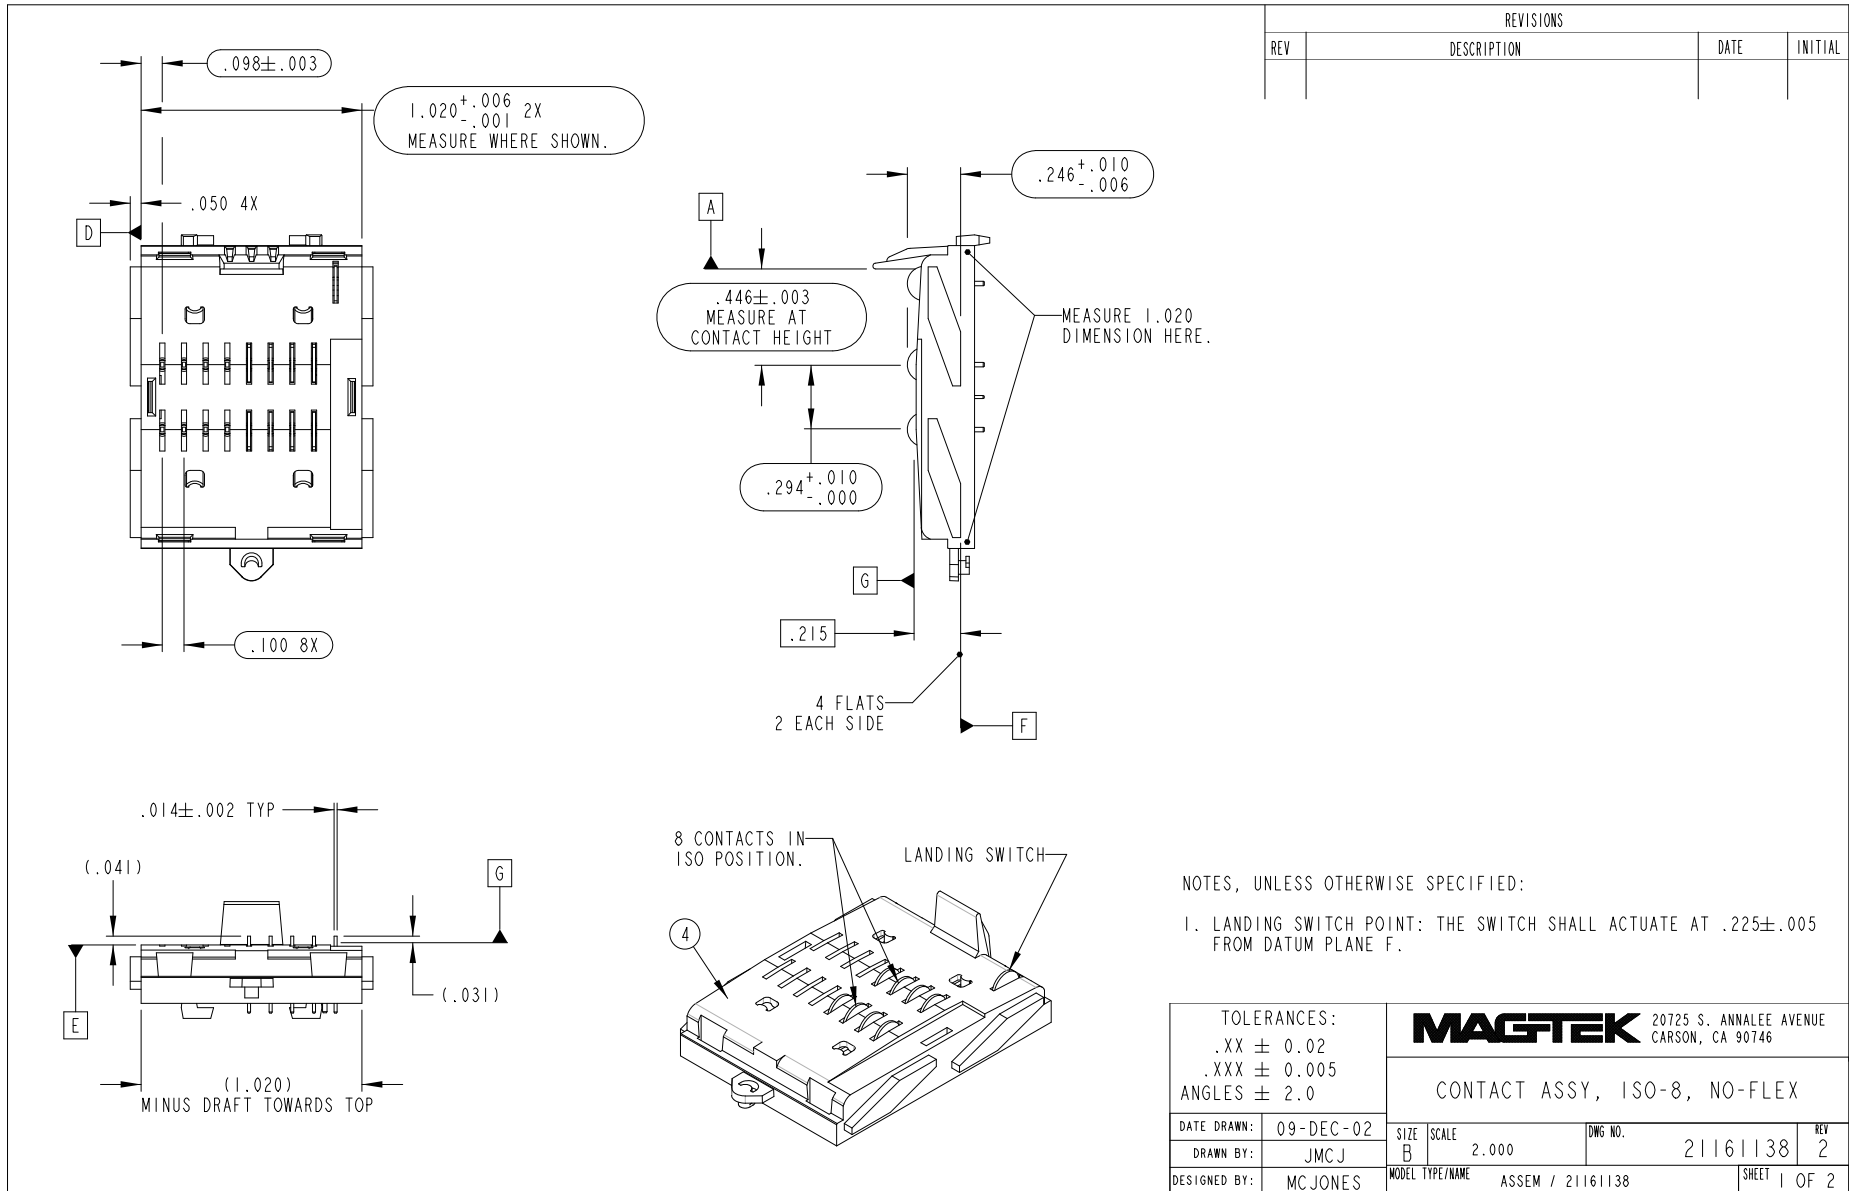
Contact Assembly, ISO-8, No Flex Sheet 1
